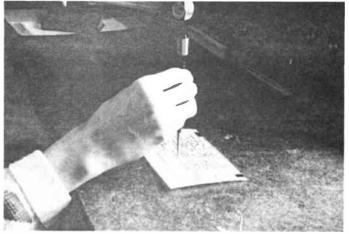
Mark the position of a few pads then draw them in with a PCB pen
